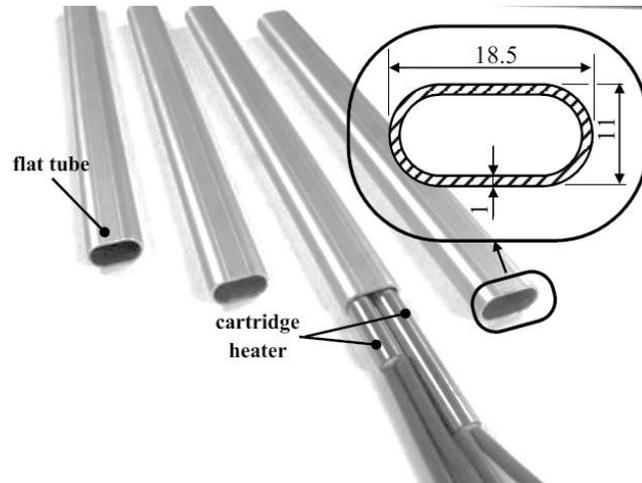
The photographs of the cross-section flat tube and assembly the heater elements; all dimensions (mm).
